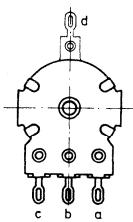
Single potentiometer with mounting bushing. For dimensions d and L, see Spindles.
